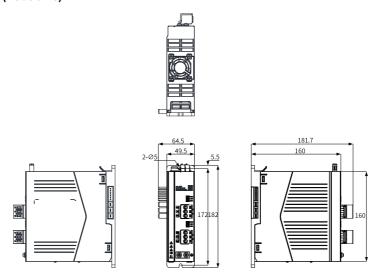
Overall and mounting dimensions of the dual-axis drive unit (unit: mm)
